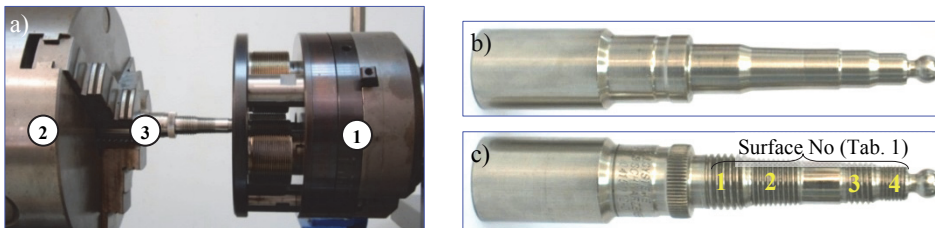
View of the working stand for the radial thread rolling head type E (FETTE) (a) and exemplary component before (b) and after (c) thread rolling: 1 – head 2 – jaw chuck 3 – object
